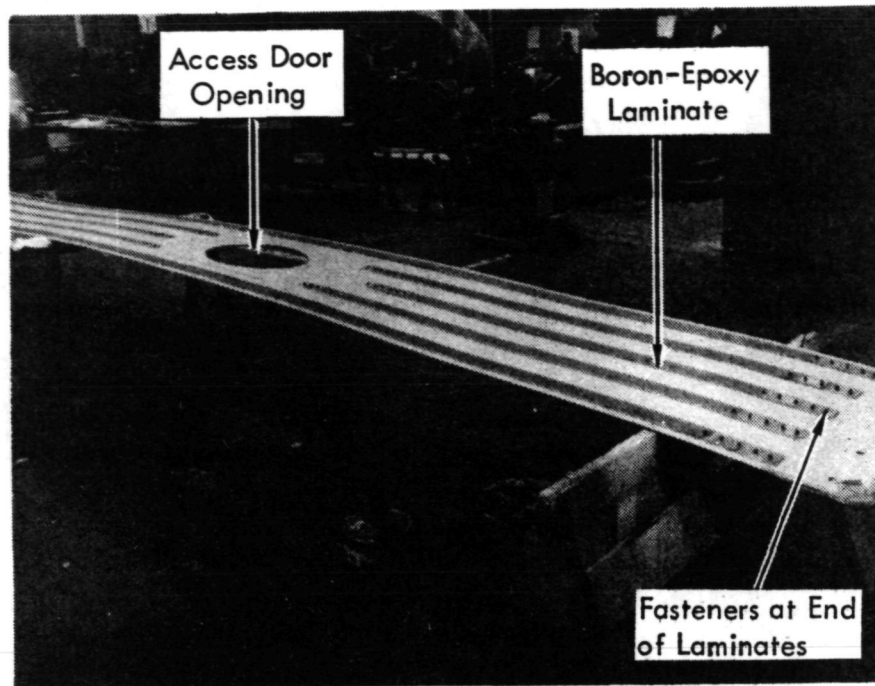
COMPLETED LOWER SURFACE WING PANEL
